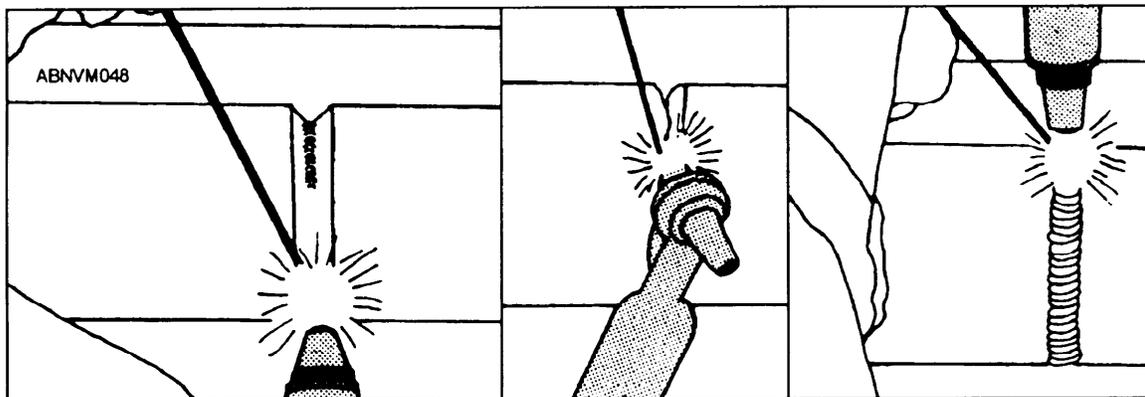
Techniques of torch and filler rod handling for tubular sections.
